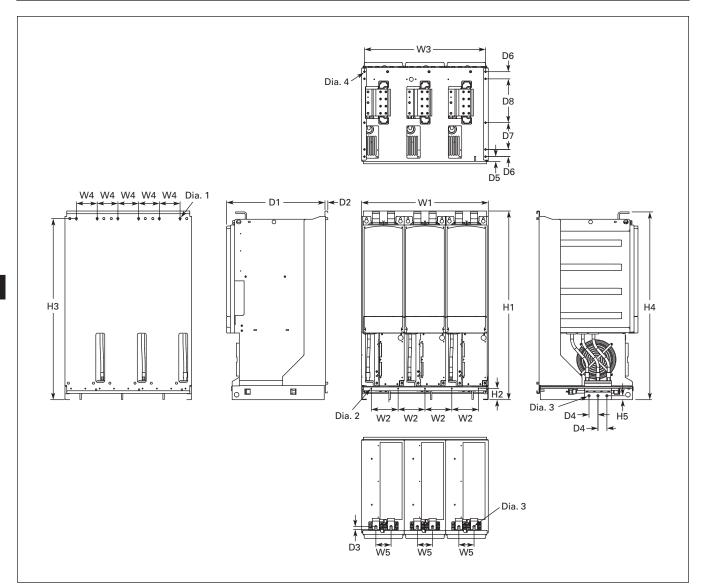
SPX9000 Dimensions, FR13 Open Chassis Inverter
